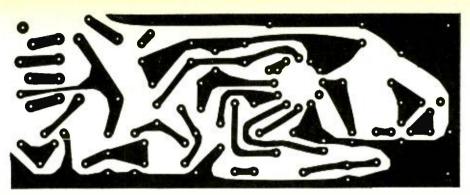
This actual-size PC board foil layout should be made on a glass-epoxy board, rather than paper phenolic, to reduce the possibility of poor operation due to stray leakage paths.
